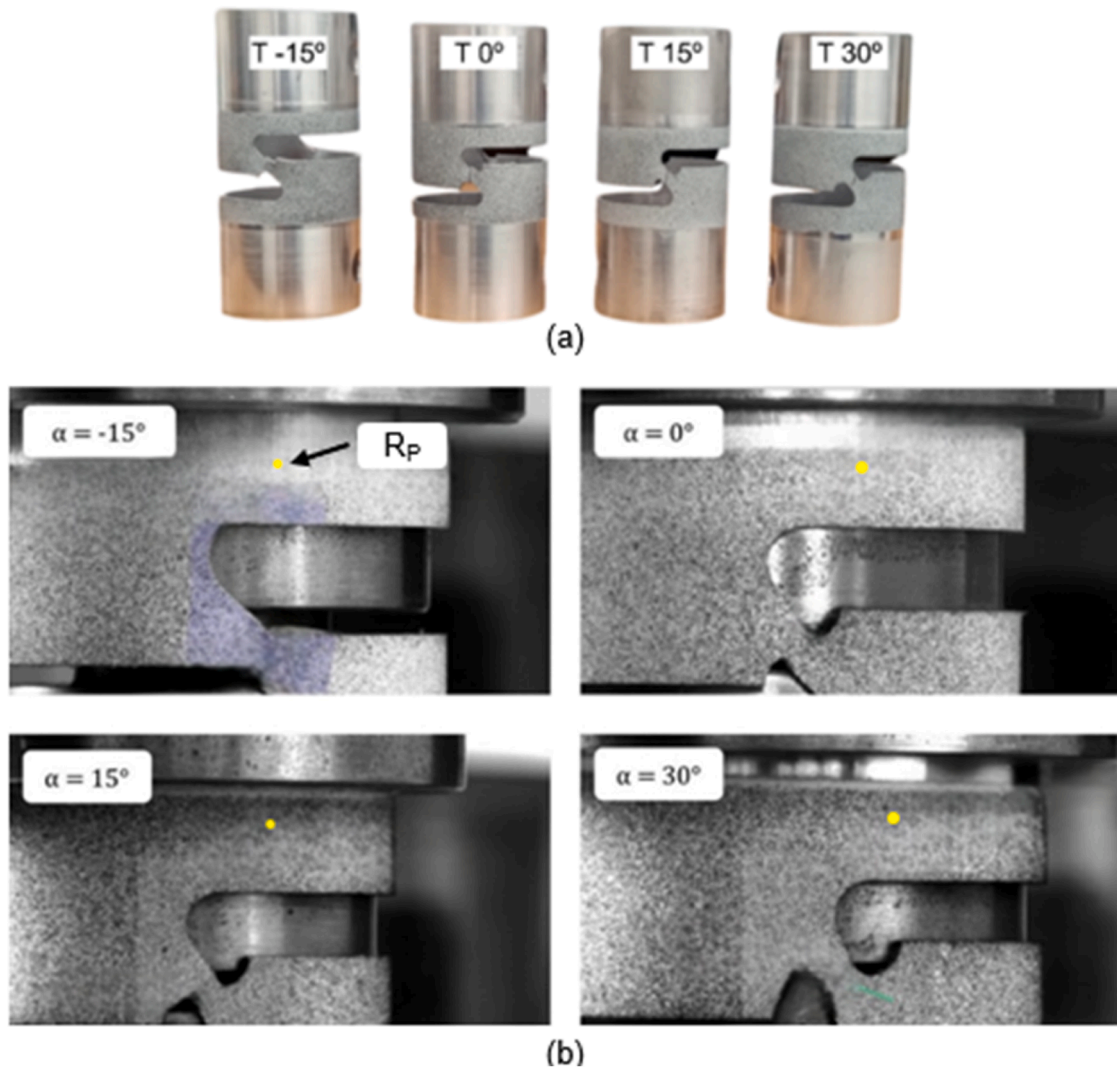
STT shear test under tension: (a) Specimens until fracture, and (b) detailed fracture zone at the precise instant of failure.
